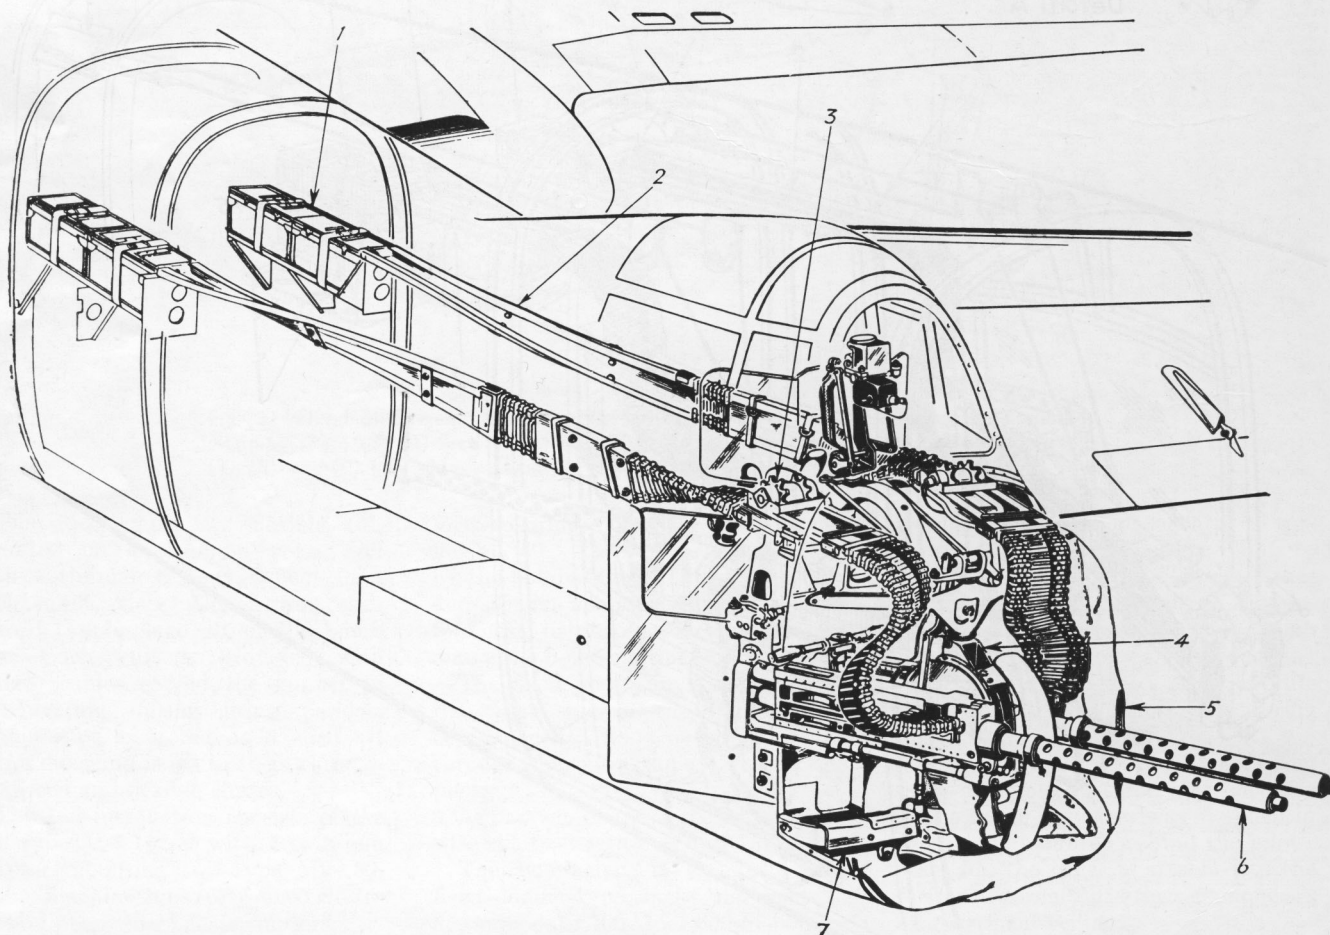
Tail turret installation: (1) ammunition box; (2) feed chute; (3) ammunition booster; (4) hydraulic remote control assembly; (5) tail turret curtain; (6) .50-caliber machine gun; (7) ejected ammunition case deflector.
